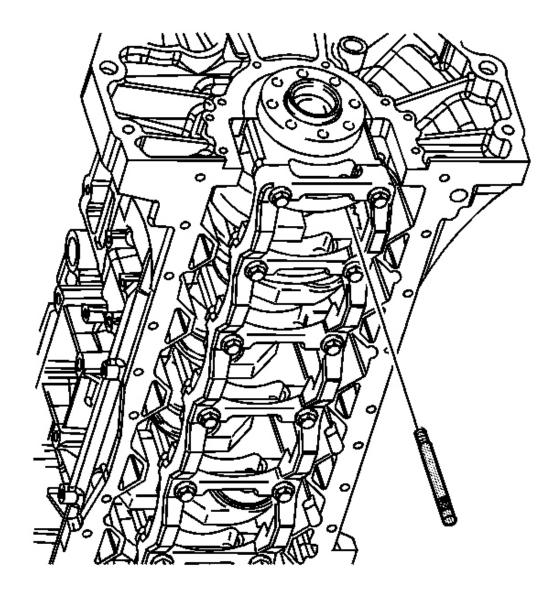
View Of J 41556 Courtesy of GENERAL MOTORS CORP.
